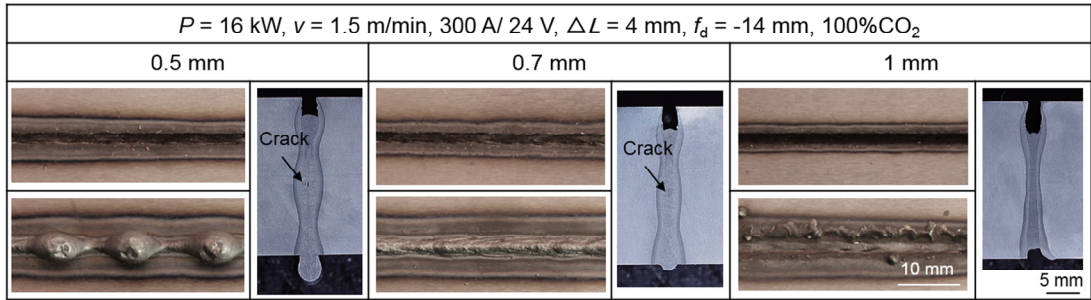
Surface appearances and cross sections of hybrid weld beads produced at various gaps.
